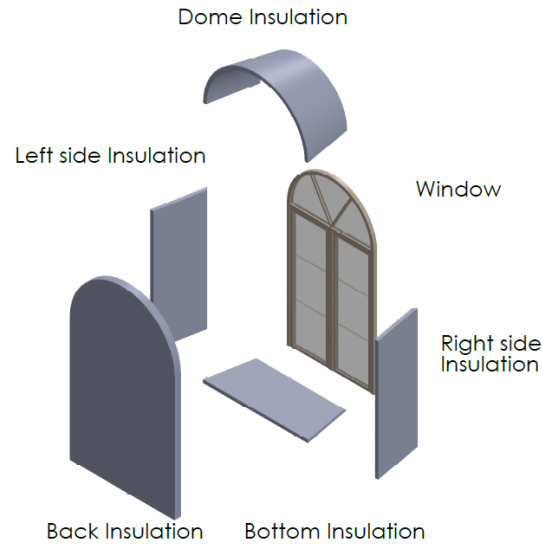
Final Hot box design including all the parts that are involved in the construction.
